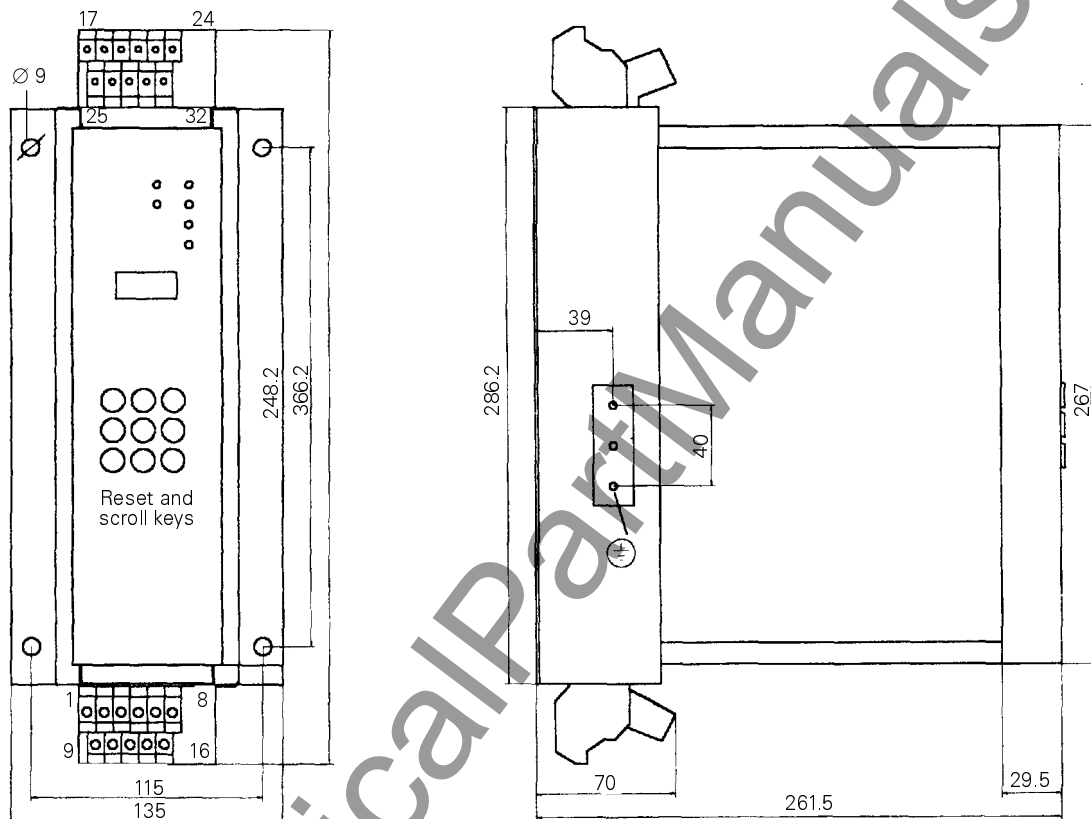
Dimensioned drawing of 7XP20 for panel surface mounting with terminals on the sides (dimensions in mm)
